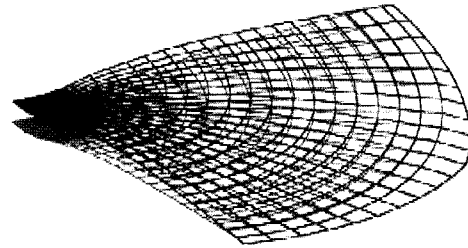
Unloaded shape of the sheet after trimming at the punch stroke of 7.62mm
